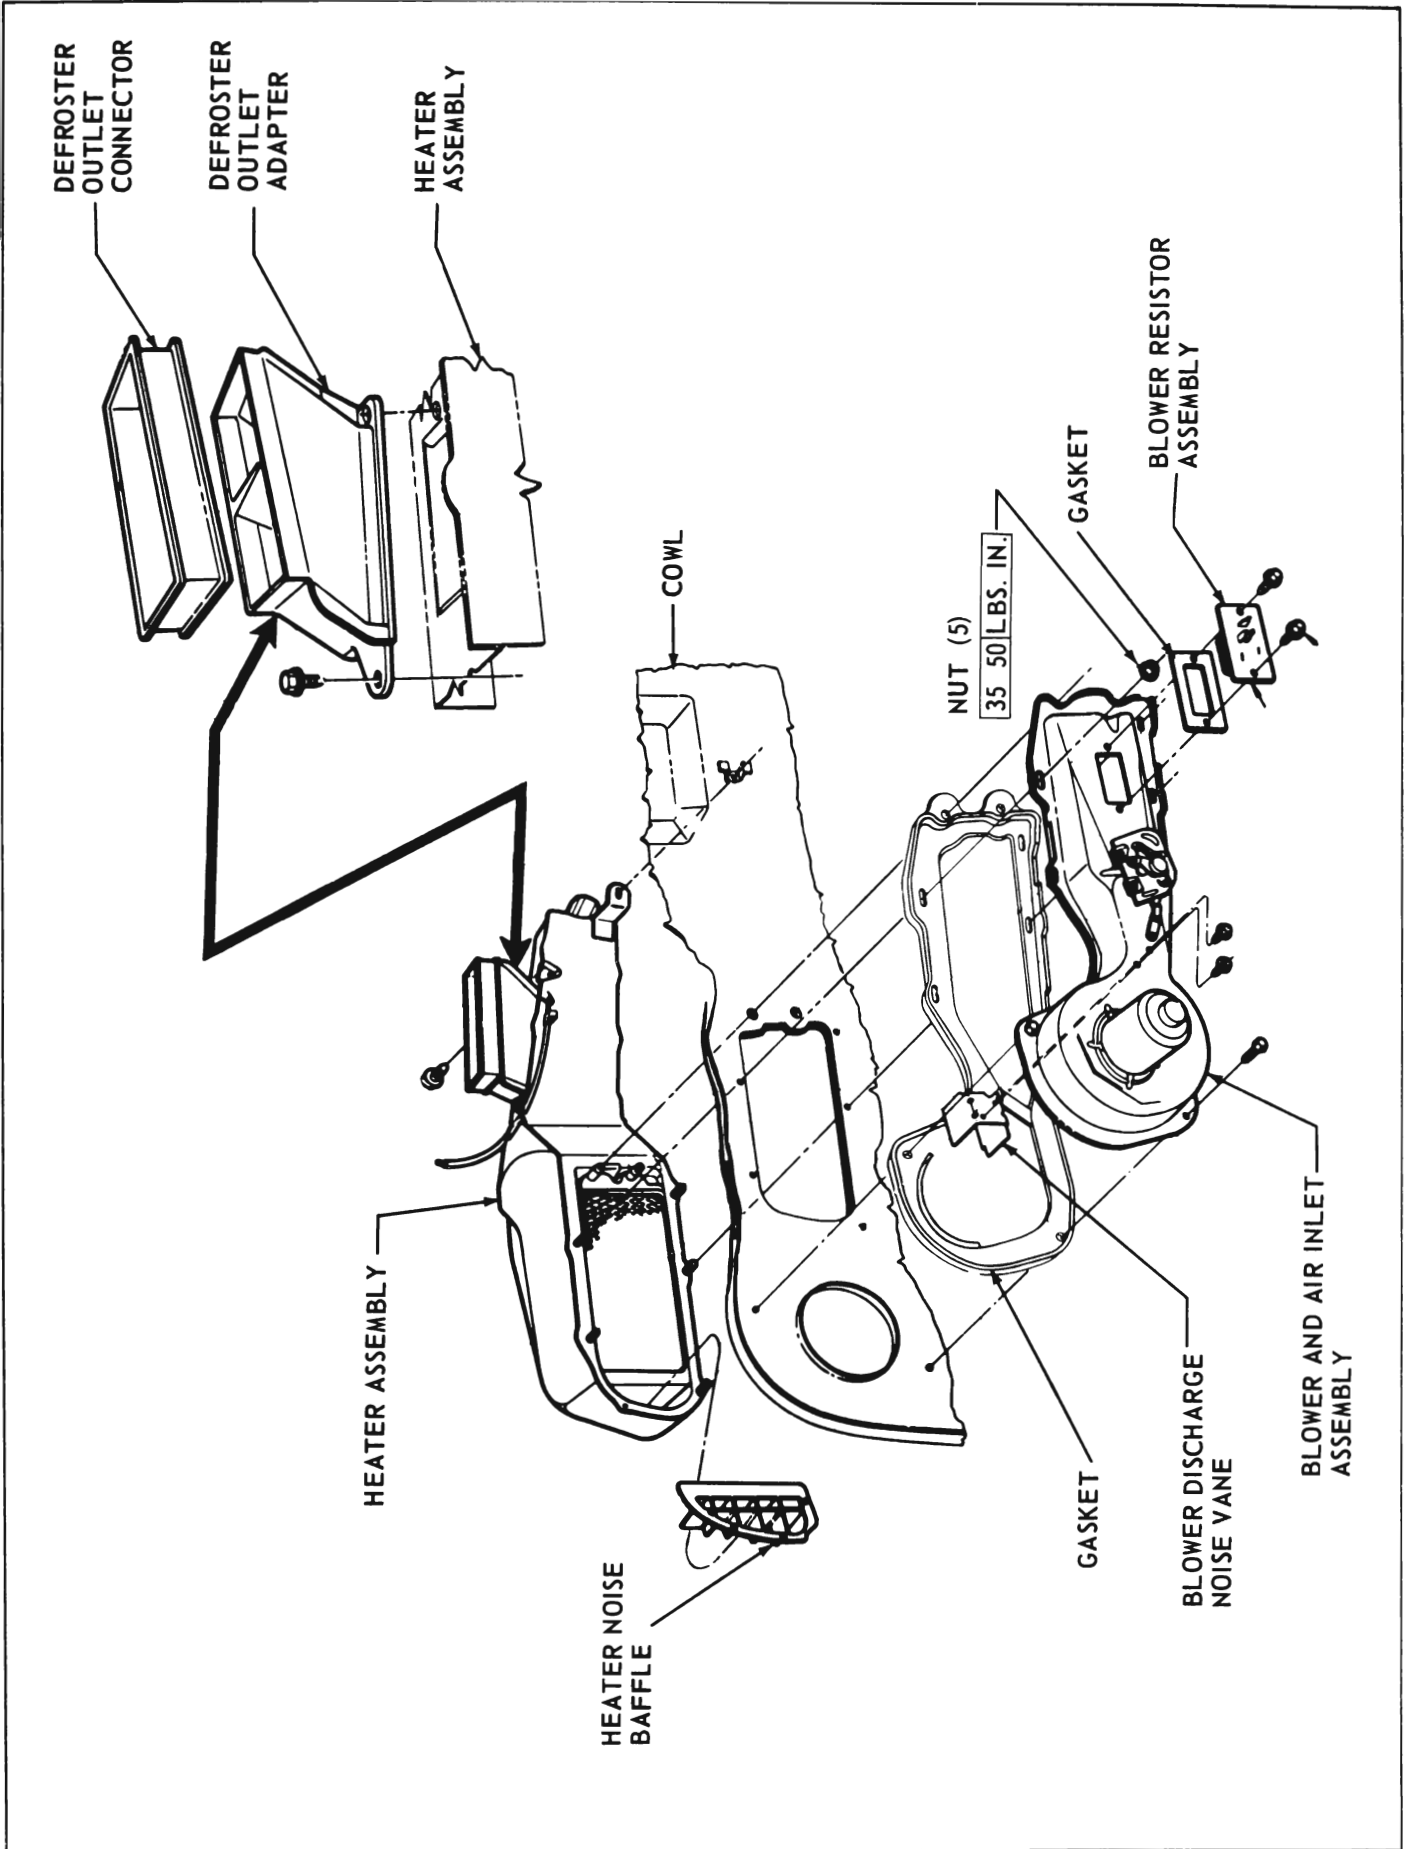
Heater System Installation - 4400, 4600 and 4800 Series
